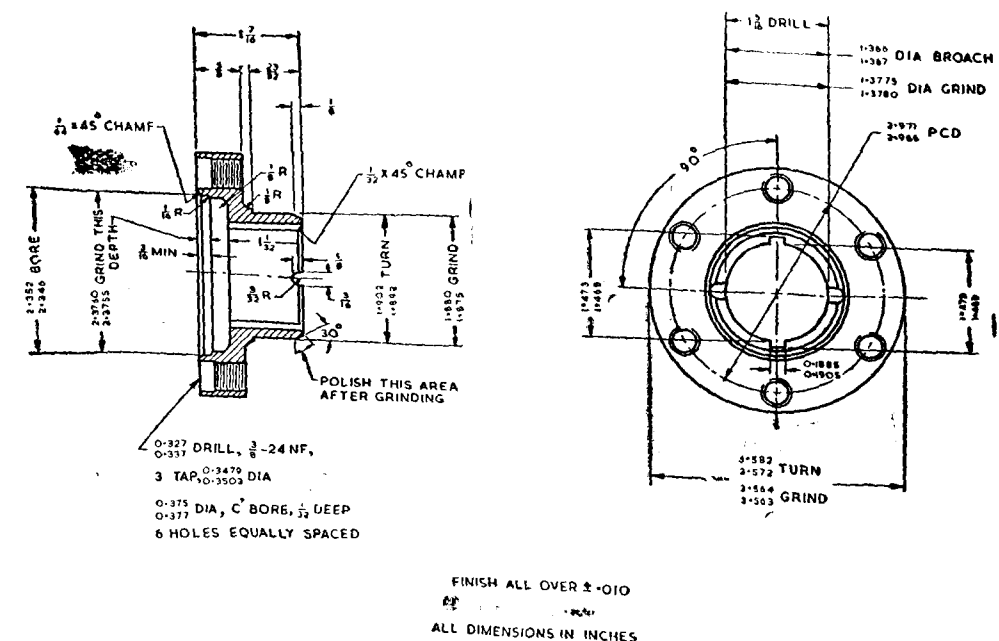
Main Drive Flange—American Drawing in original Inch System
